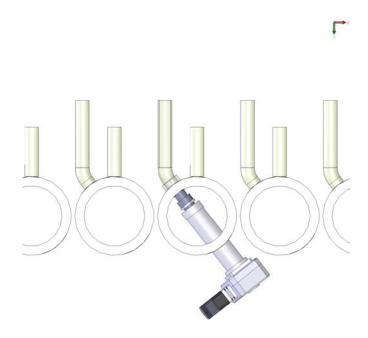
Schematic View of the Compact Elbow-To-Stub Tube Welding Device
